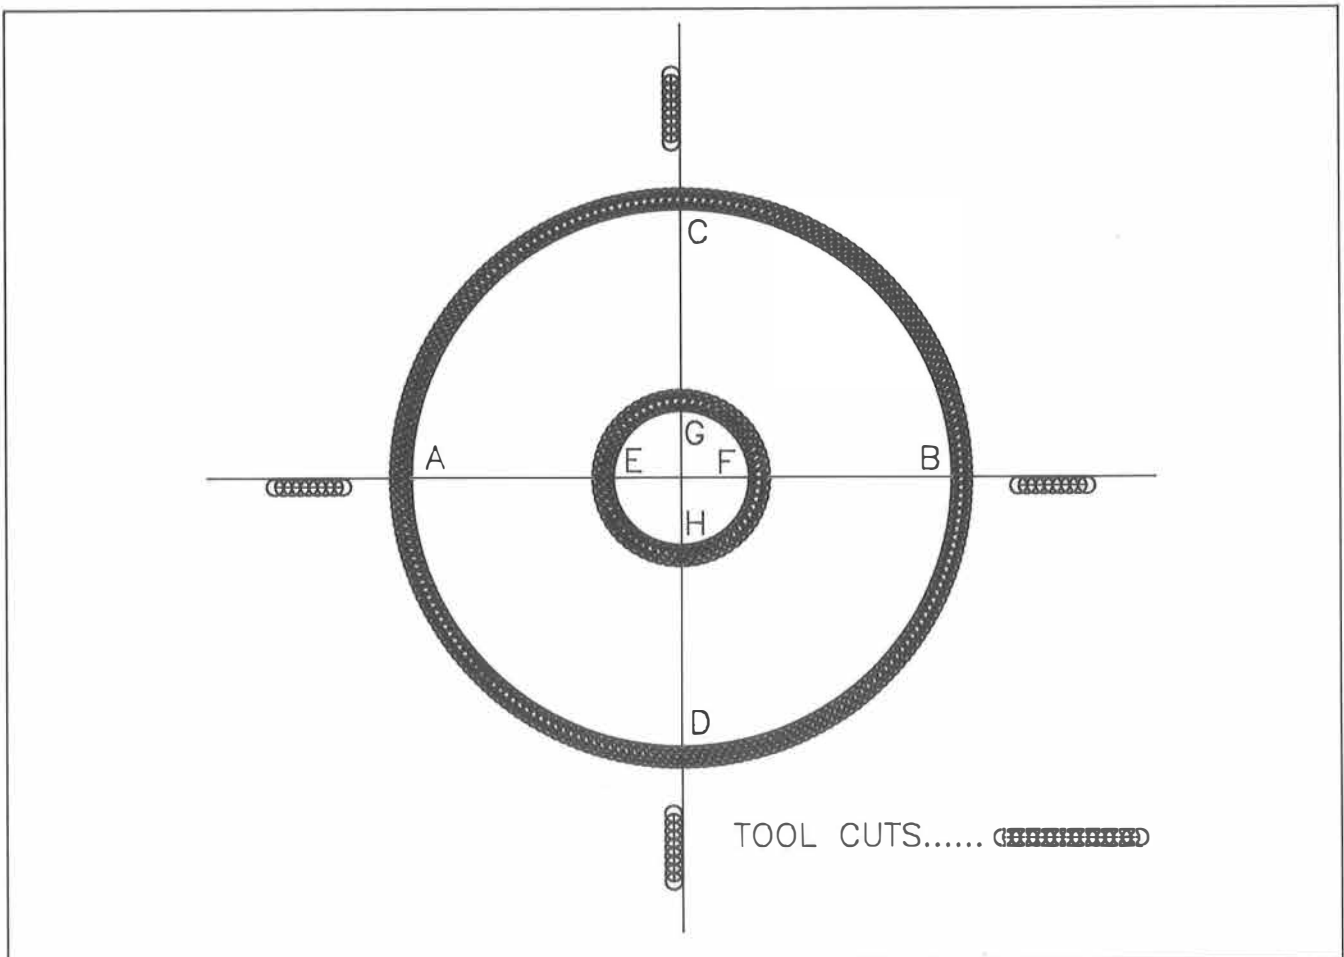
Drawing showing accuracy cuts in acrylic sheet and measurement points for both the 2-inch and 8-inch circles.
